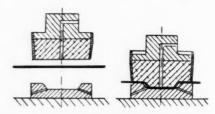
a and b, Deep-Drawing Die with Rubber Stamp: (Left) before the Pressing; (Right) During Pressing
